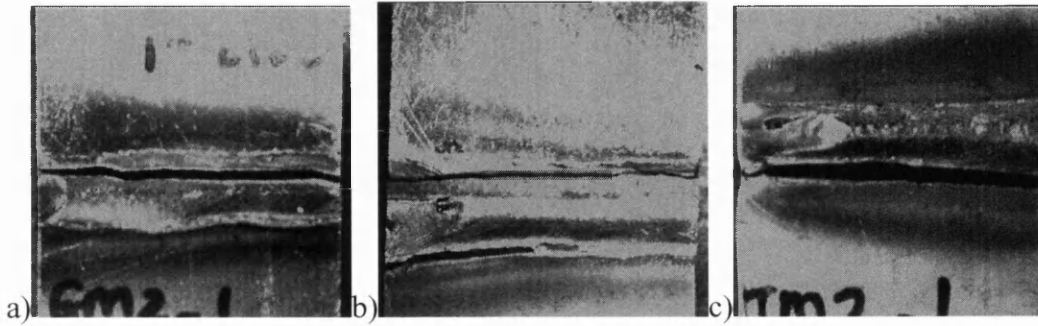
Typical Failures of M2 Specimens a) Throat Failure, b) Throat and Toe Failure, c) Toe Failure
